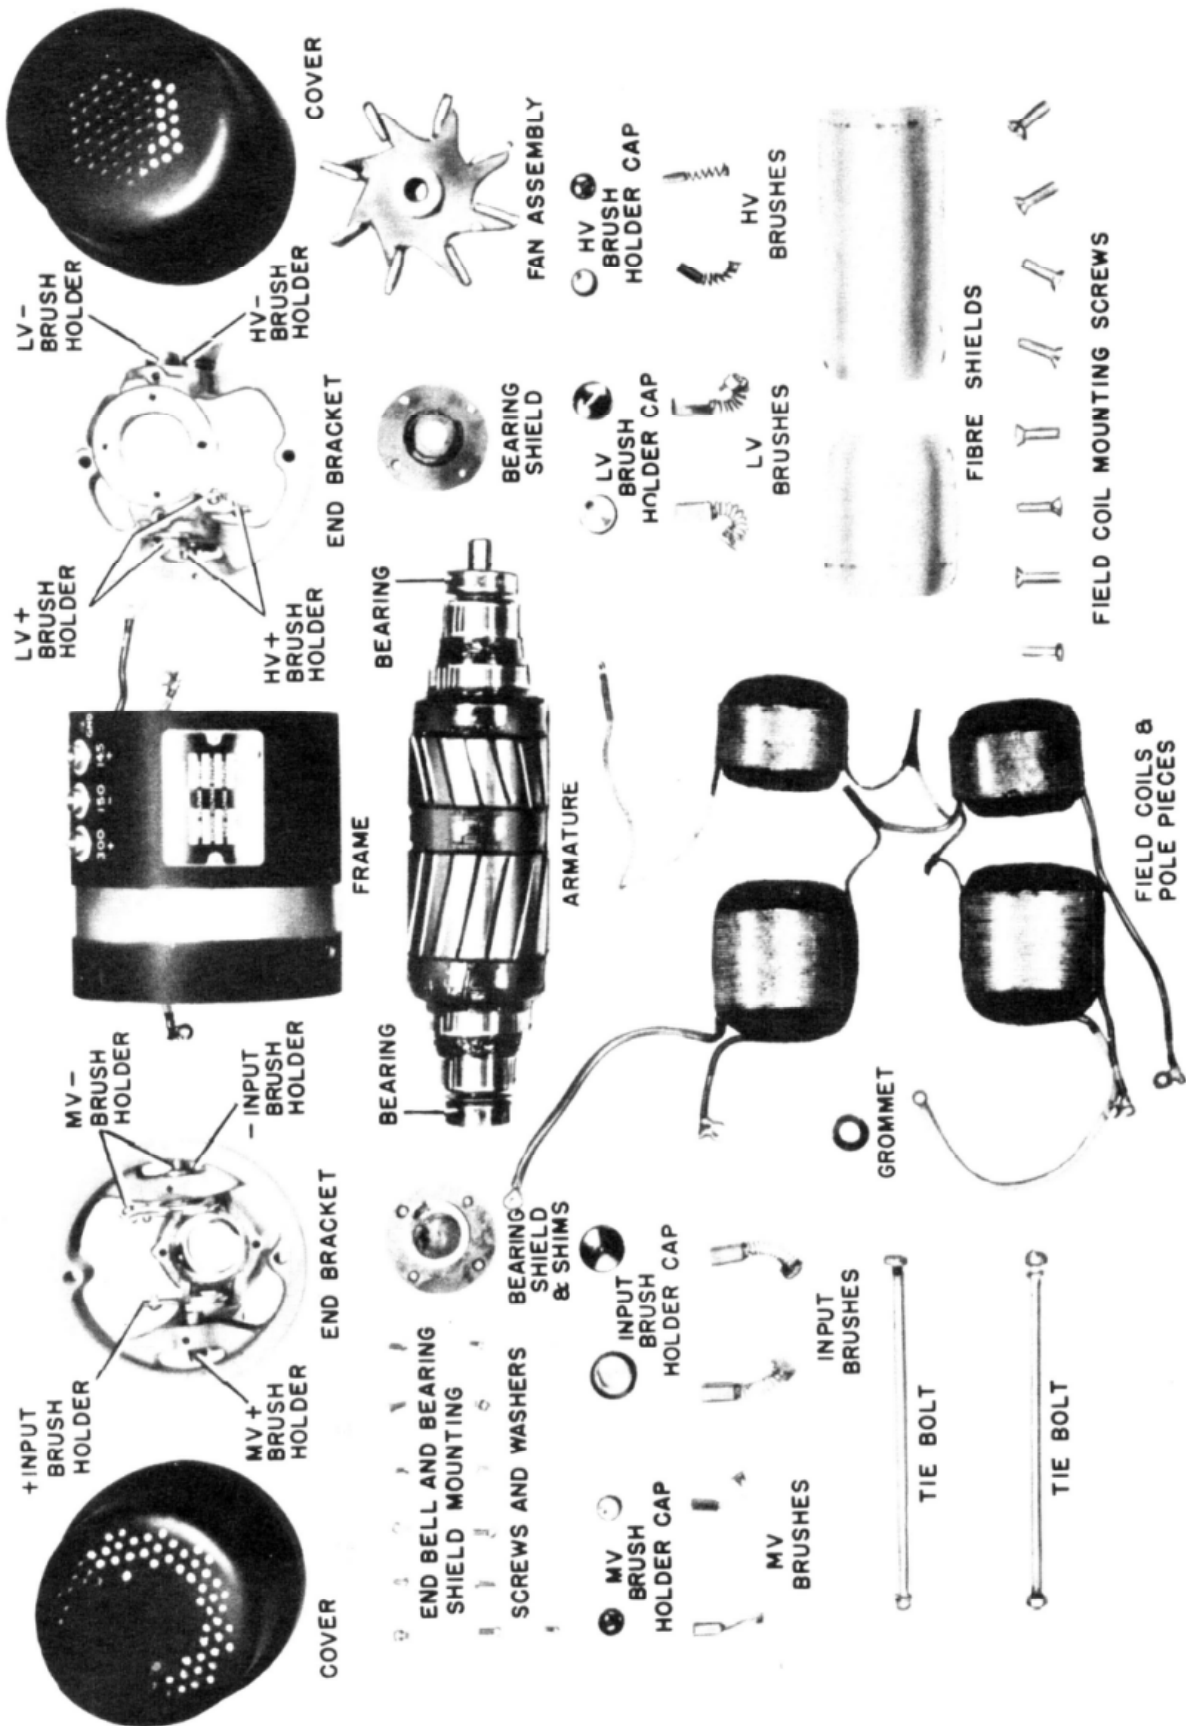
DYNAMOTOR UNIT PE-94-AM, DISASSEMBLED
